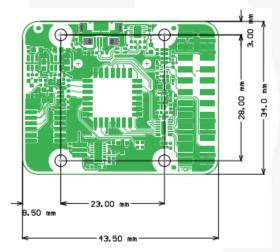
Outer Dimensions of the FEBFMT Board (PCB spacers are placed).
